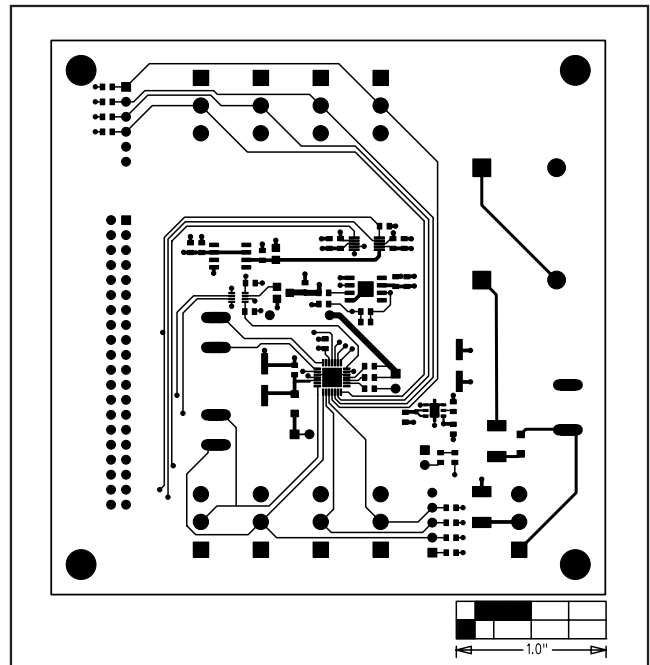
MAX13036 EV Kit PCB Layout—Component Side
